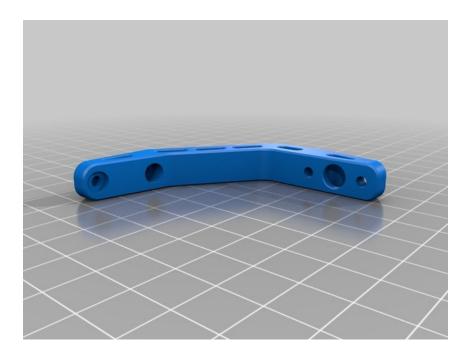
Gimbal Motor Frame 3 (Courtesy: www.thingiverse.com/thing:1247236)
